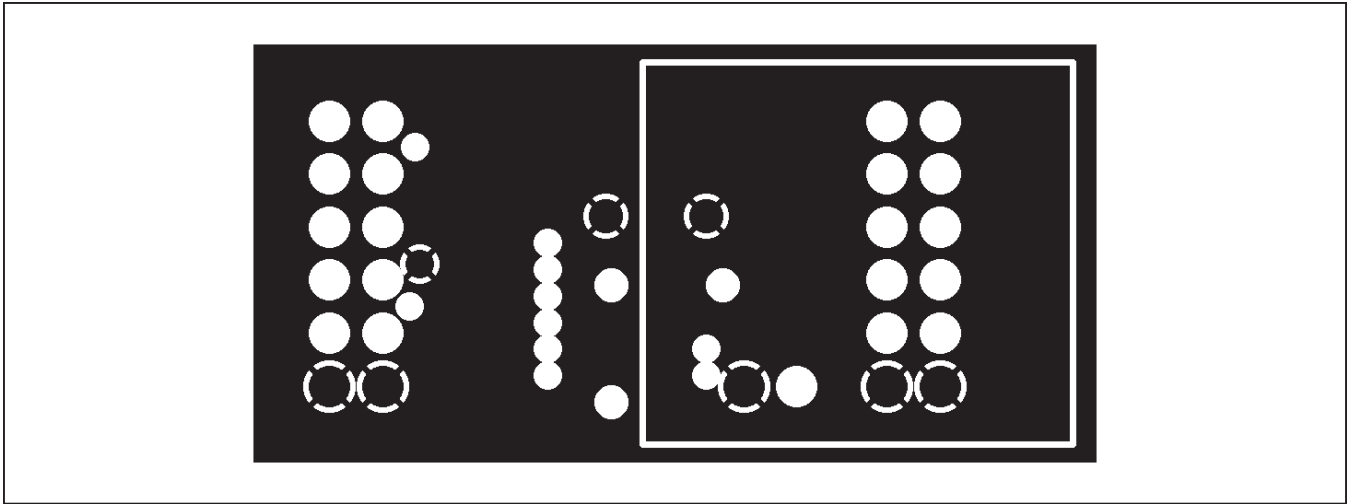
MAX14850PMB1 Peripheral Module PCB Layout—Inner Layer 2 (Power)
